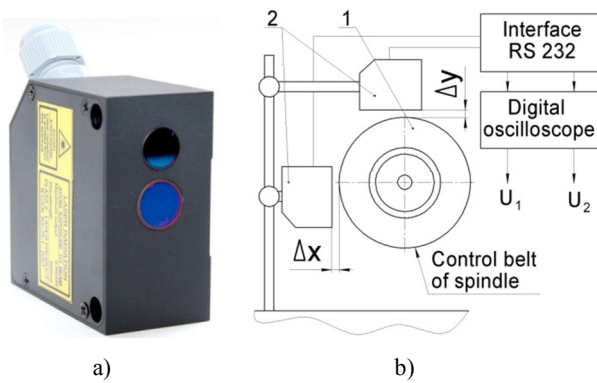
Laser triangulation sensor a) and measuring schema of spindle displacements b): 1 - spindle; 2 - laser sensors
